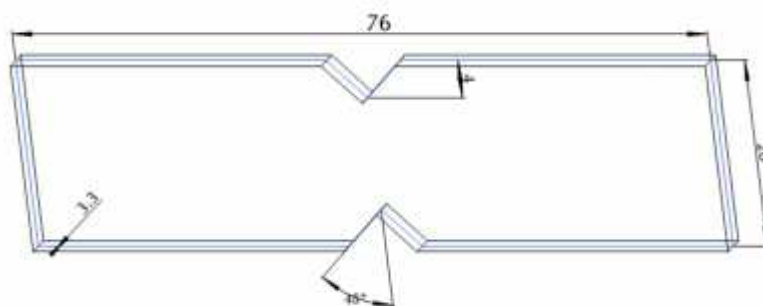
Geometry of the Iosipescu shear test specimen
